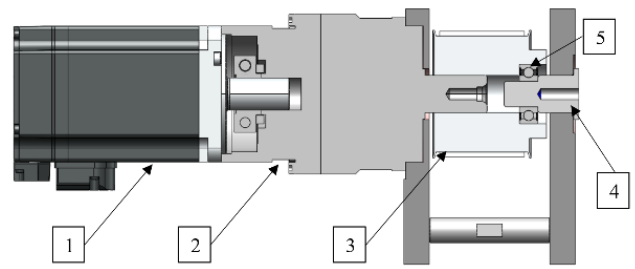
Cross-section of the Z-axis drive system node. 1 – servo motor, 2 – planetary gear, 3 – drive pulley, 4 – supporting axis, 5 – ball bearing
